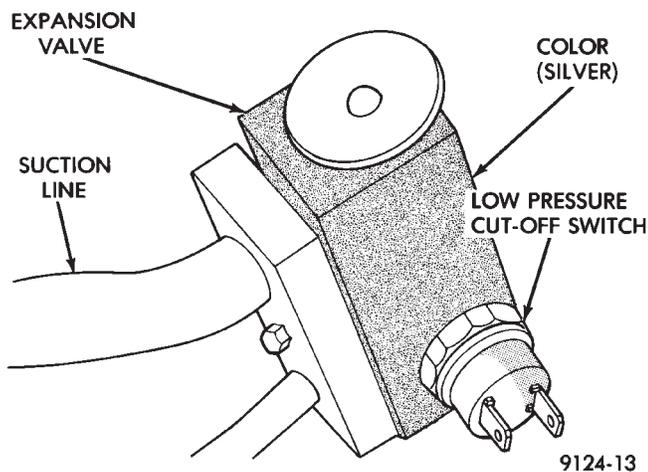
Low Pressure Cut-Off Switch and Expansion Valve—Typical
